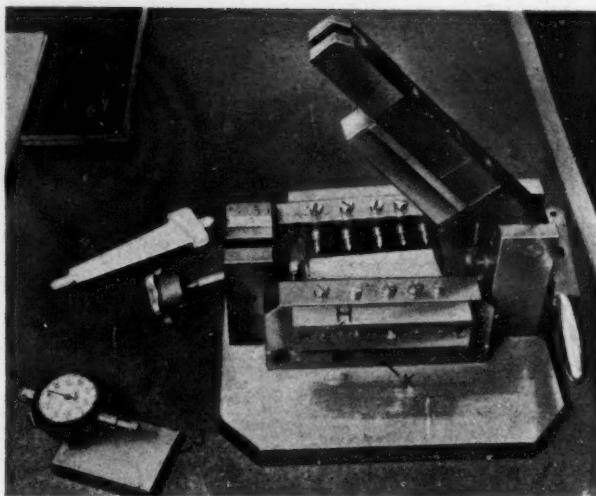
In this Inspection Fixture, the Width of the Blade can be Checked at Five Different Positions with the Aid of the Dial Indicator at the Left, which is Graduated in 0.001 in. Divisions
